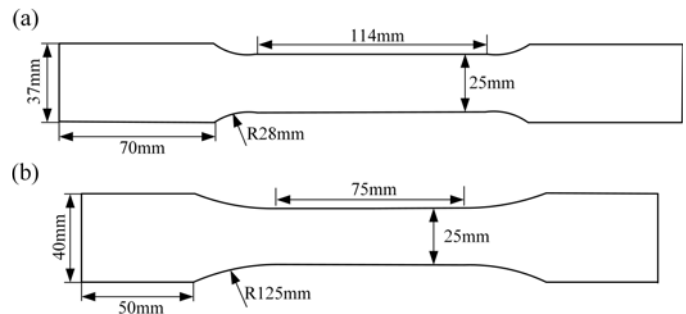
Schematics of (a) tensile specimen and (b) fatigue specimen
